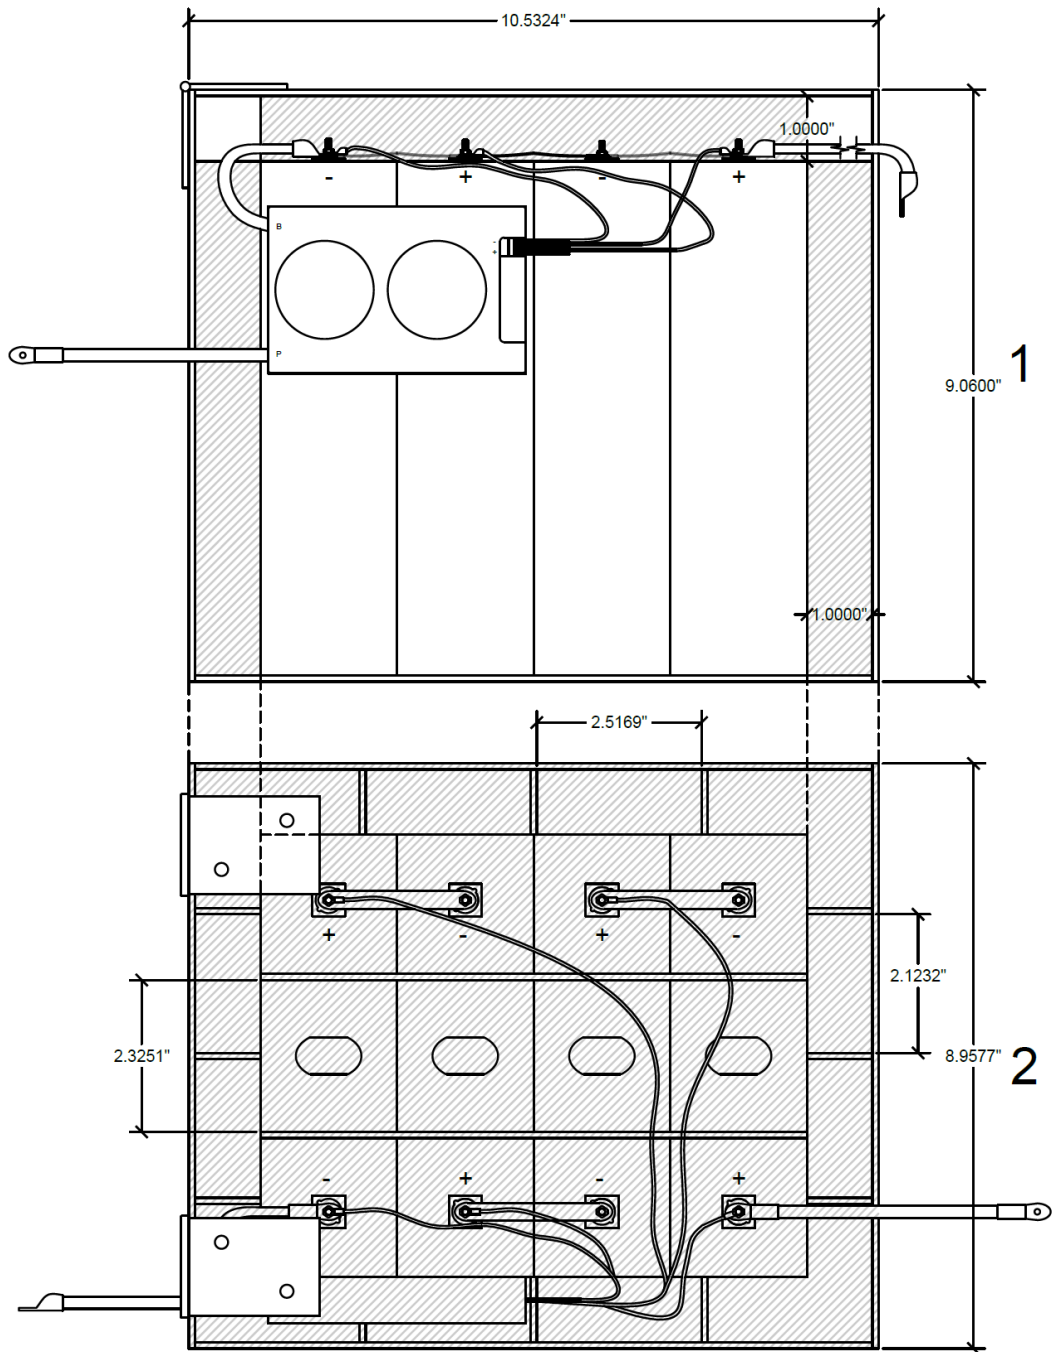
Custom Plexiglass Battery Assembly Enclosure
